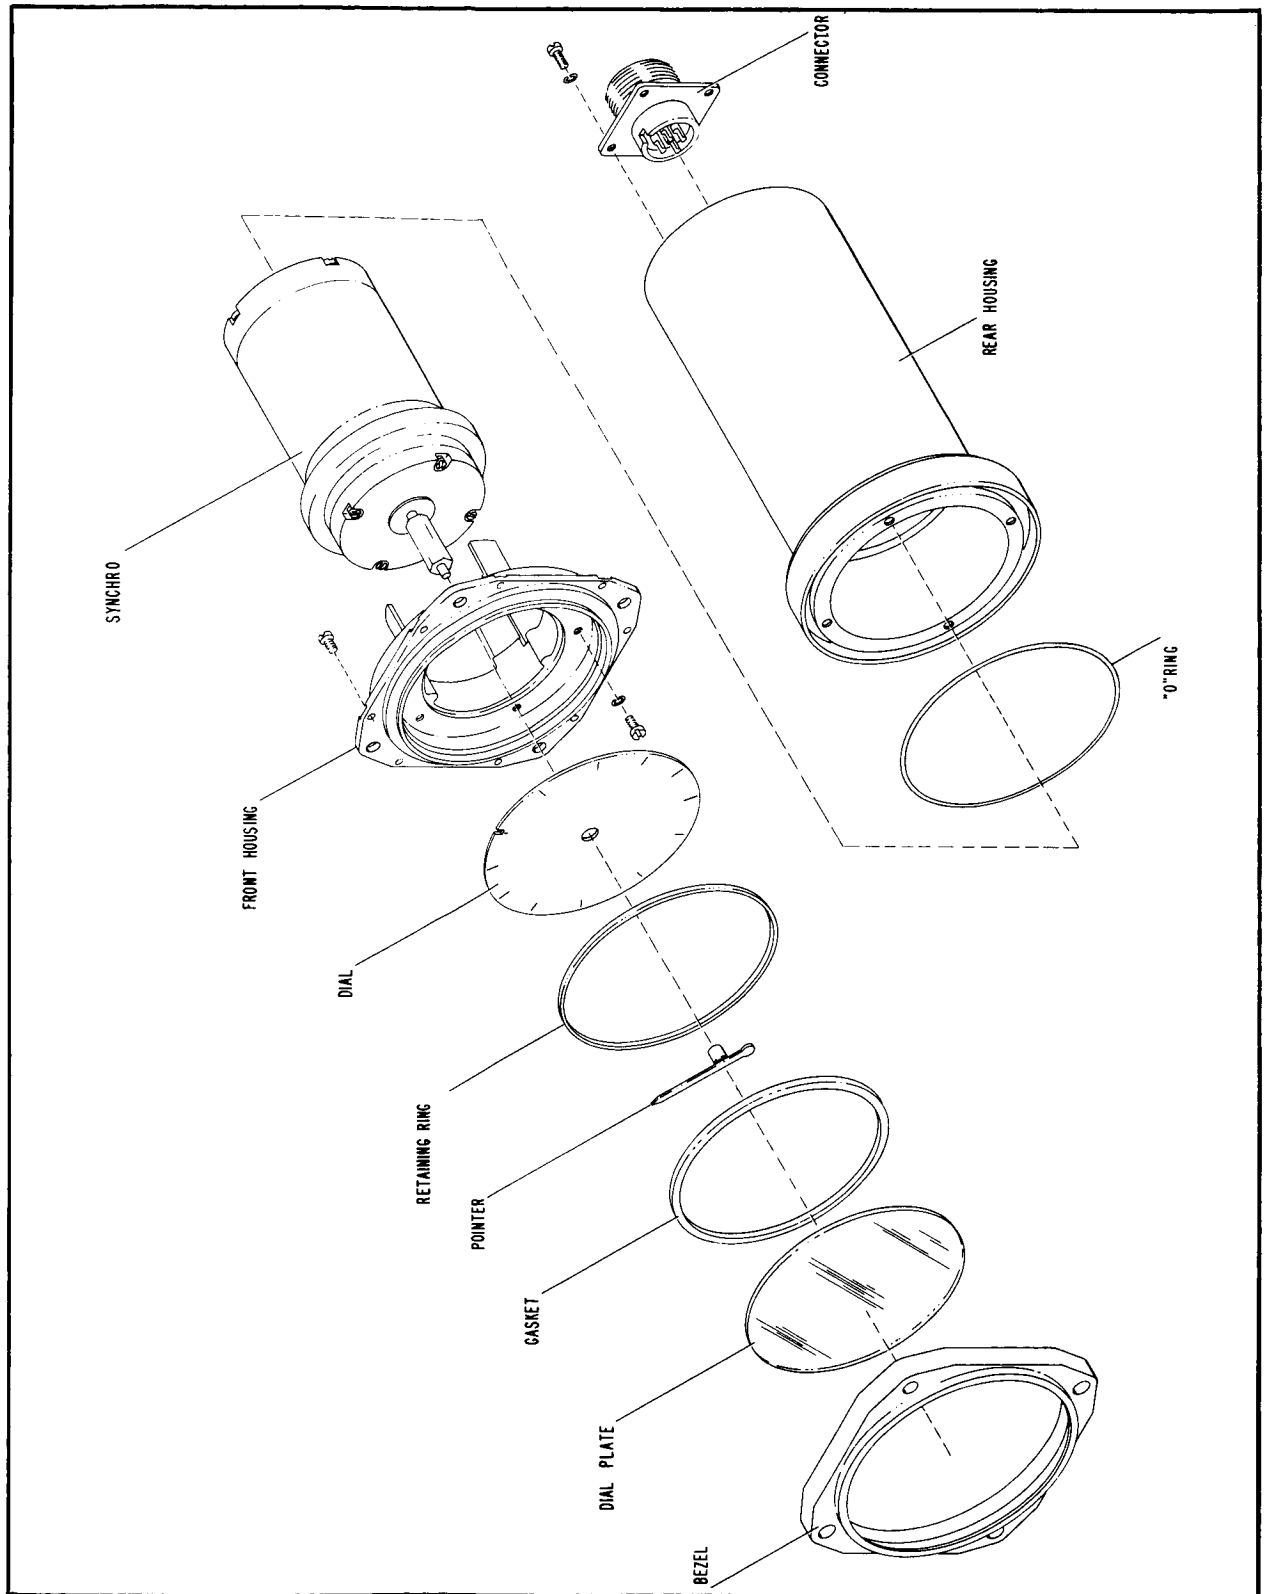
Acquisition Data Console Synchro Receiver, Exploded View
